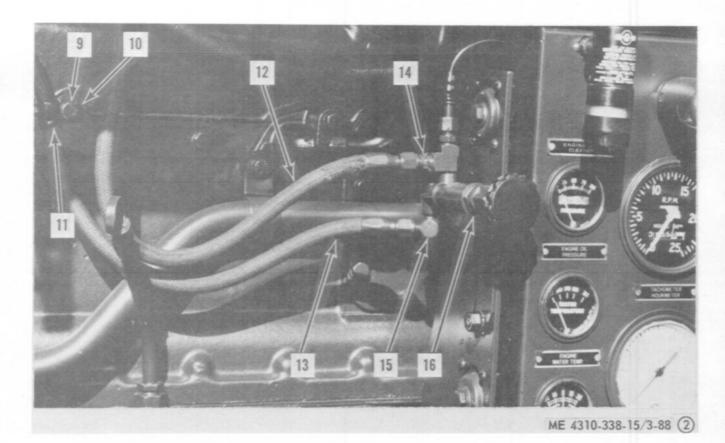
Fuel lines and fittings, removal and installation (sheet 2 of 4).
